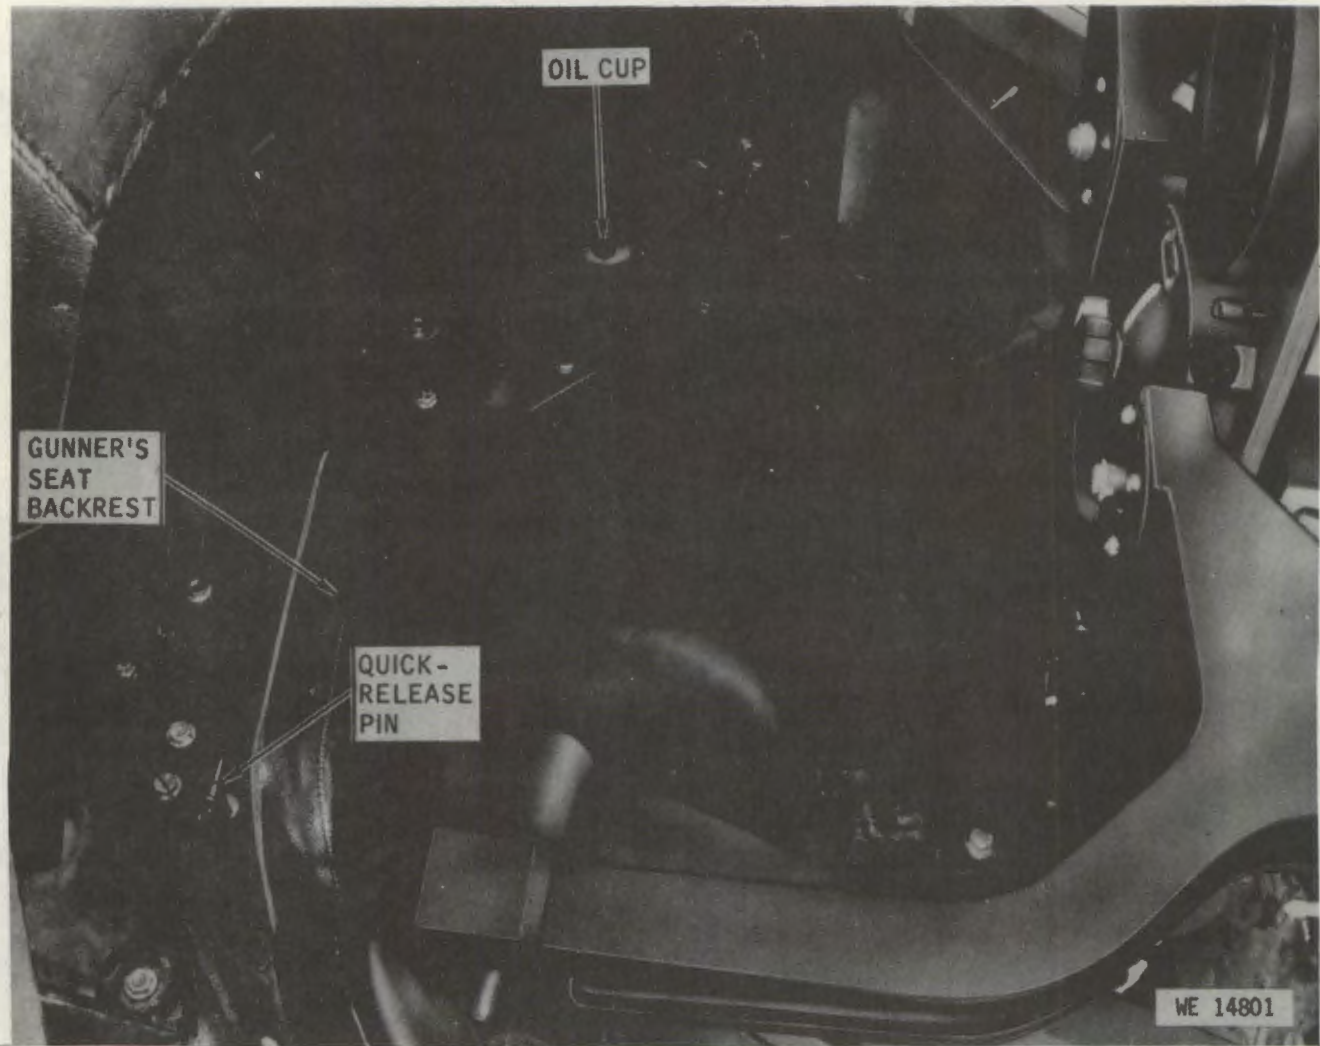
Gunner's seat backrest and mount oil cup, removal installation details
